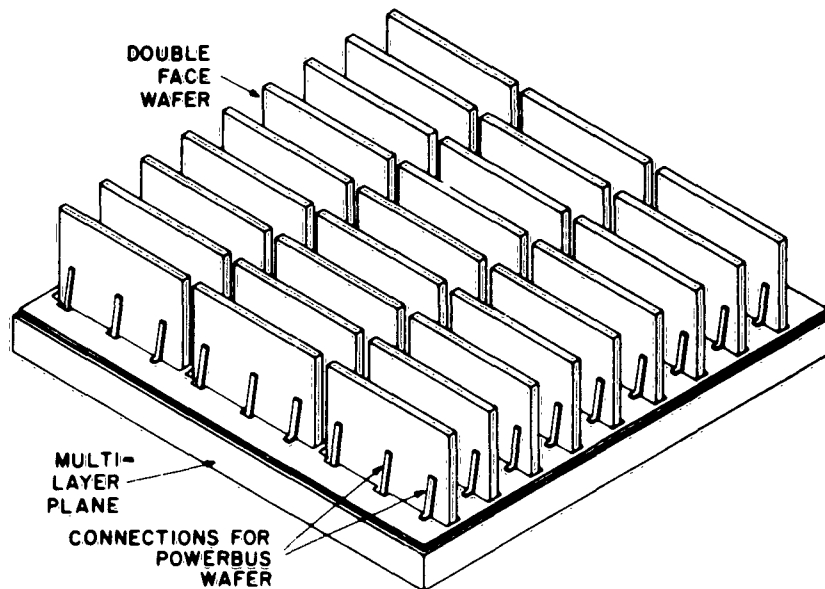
Subassembly Using Multi-Layer Frame (1)
